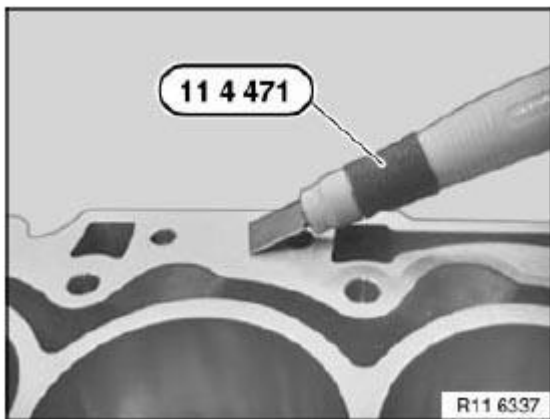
Removing Coarse Residues On Sealing Faces Using Special Tool 11 4 471
